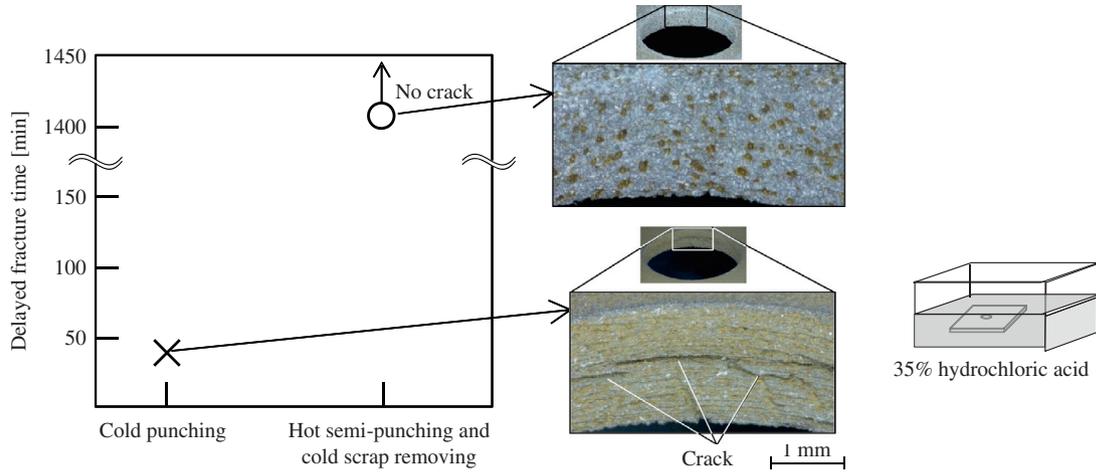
Delayed fracture times around hole edge for cold punching and hot semi-punching and cold scrap removing.
